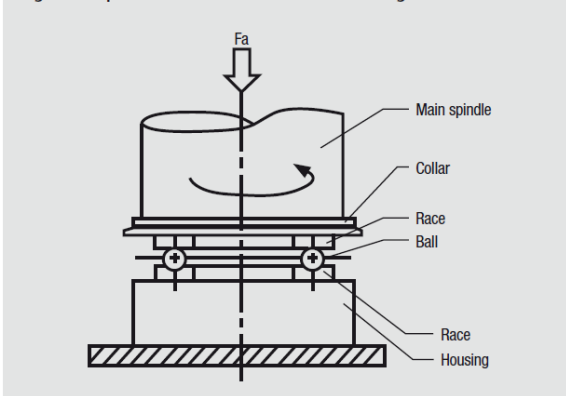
Spindle Section of the Thrust Bearing Test Machine
